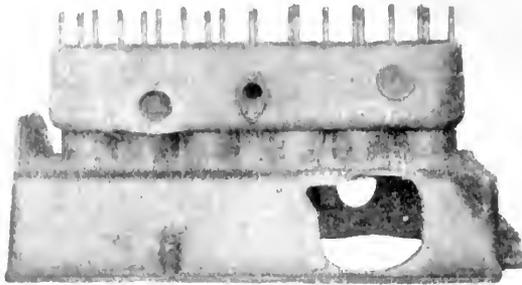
Break in Cylinder Block Studded Preparatory to Welding
